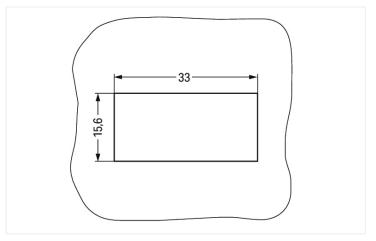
Plate thickness: 1 ... 3 mm Cutout tolerance: + 0.1 mm
